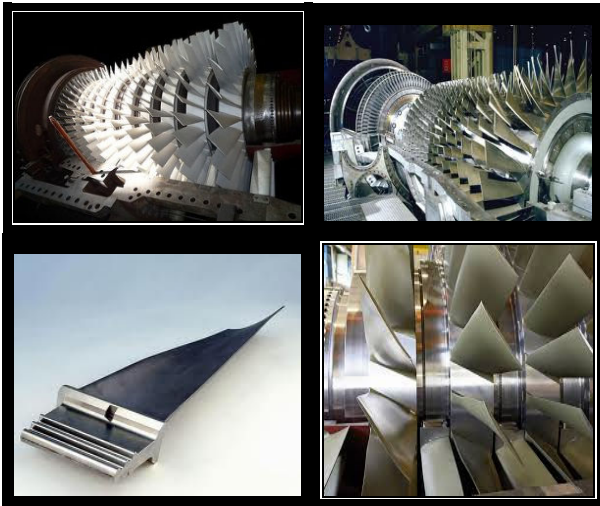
Typical blades related to gas turbine SIEMENS162MW - V94.2
